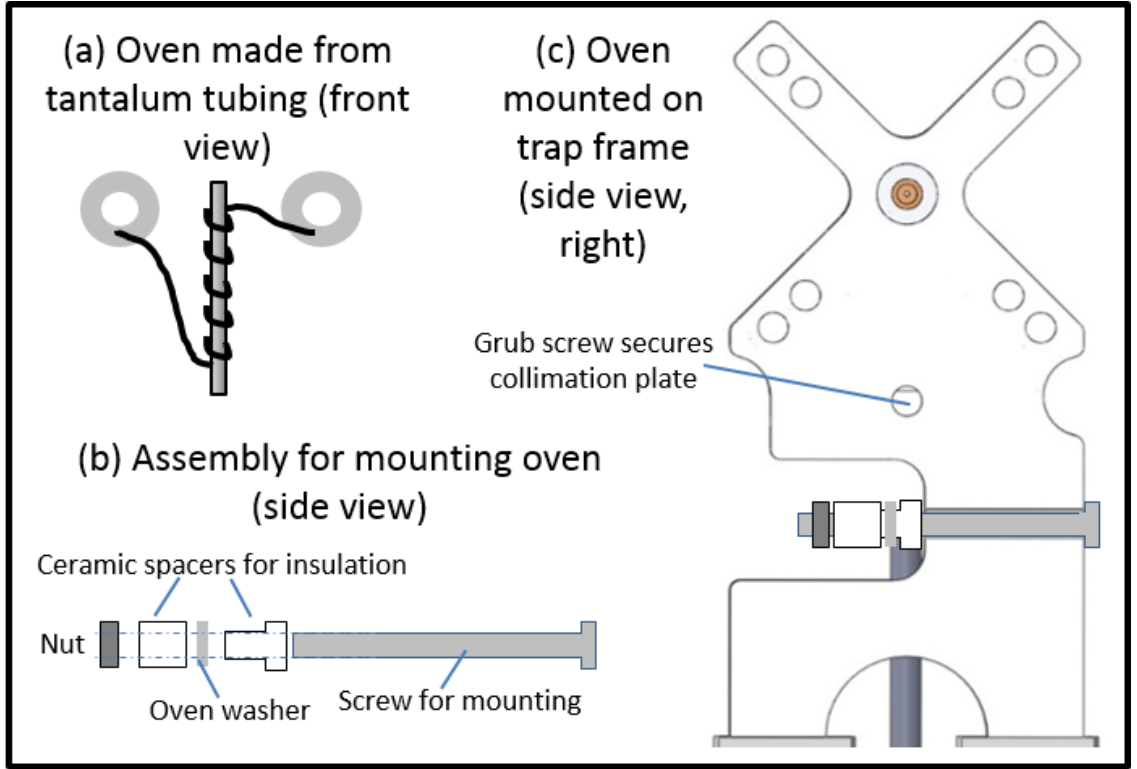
The oven assembly and mounting. (a) The tantalum oven with washers for mounting (b) One of the two assemblies needed for mounting the oven to the trap. (c) How the oven is mounted onto the main trap frame. The oven is aligned so that it points directly up to the trap centre.
